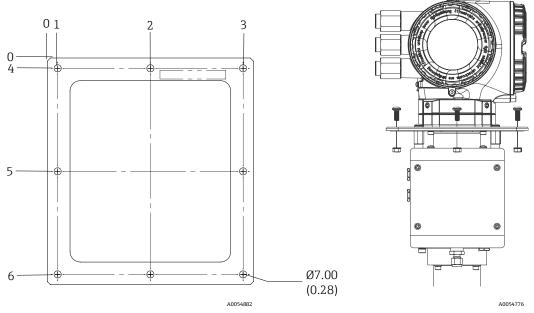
Enclosure mounting plate and hardware. Engineering units: mm (in)
